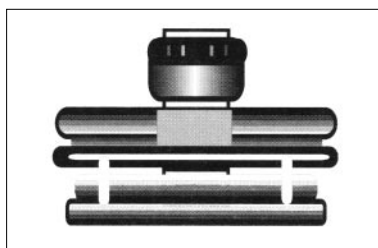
Style b) Shur-Loc® Cap Assembly Compression Cap
